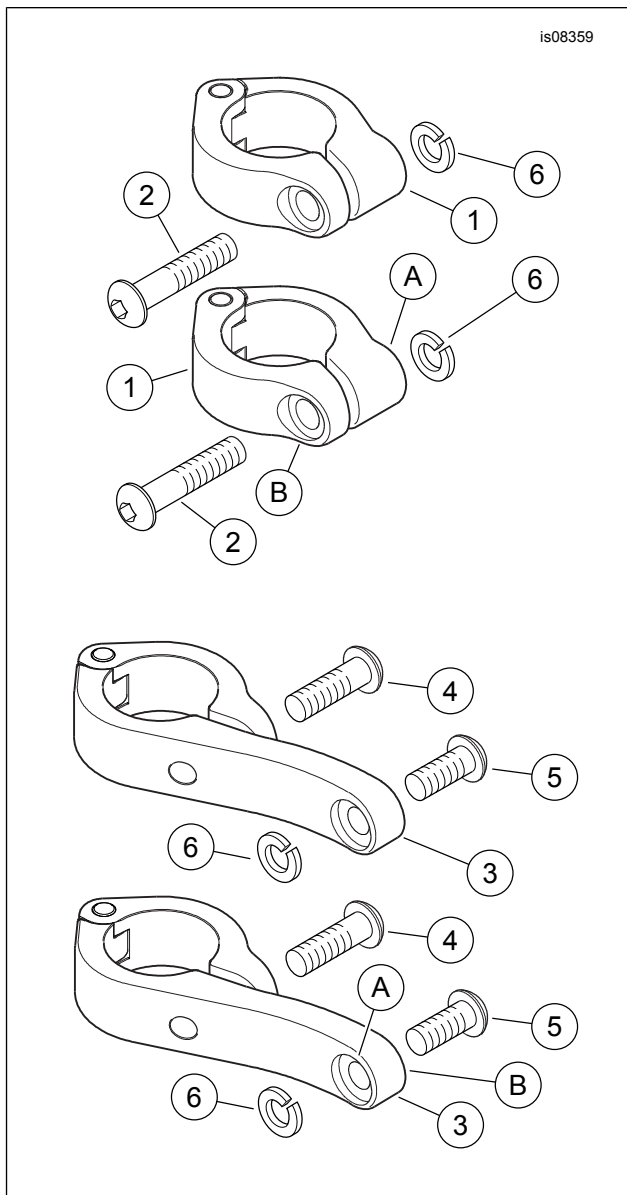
Service Parts, LED Bullet Fog Lamp Mounting Kits
